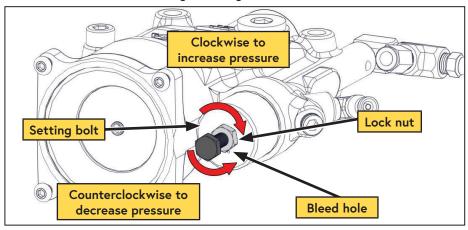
Adjusting the inlet pressure regulator (air filter plate removed for clarity)
